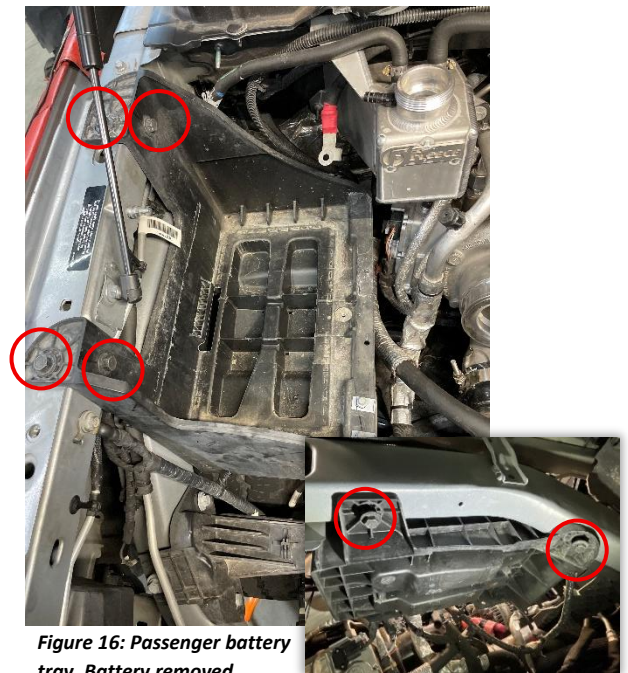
Passenger battery tray. Battery removed. Fasteners circled for clarity
